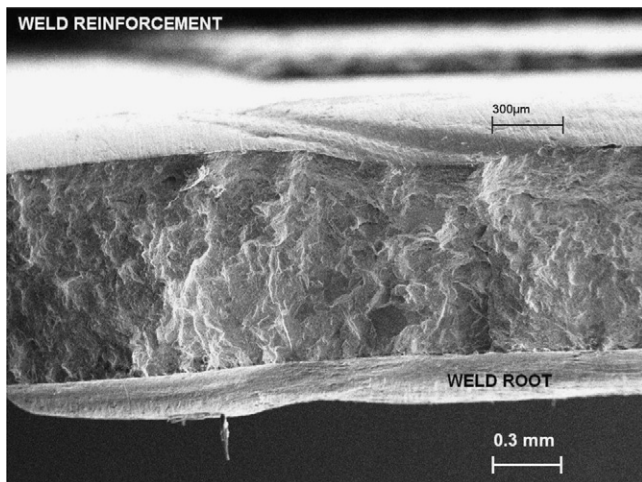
Scanning electron microscopy of the fracture surface of a welded joint, whose fatigue crack began at the weld toe.
